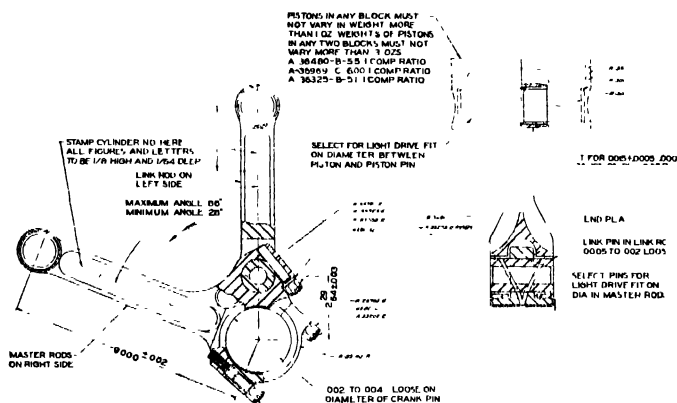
Connecting Rod Assembly of Packard Aircraft Engine Model 2A-1500 Showing Clearances.
